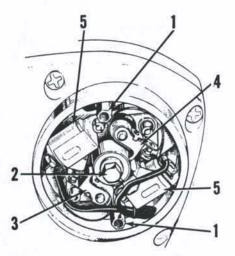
The ignition cam and advance assembly is mounted on the right end of the camshaft. Black and yellow wire goes to breaker points (3) and black and white wire goes to breaker points (4).
